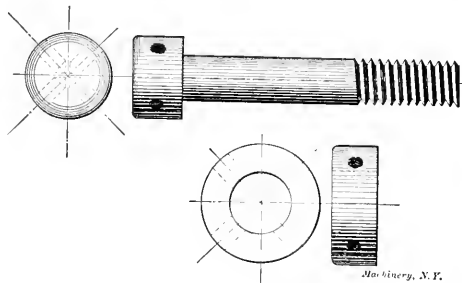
Capstan Screw and Nut with Holes Drilled in Screw Machine.
